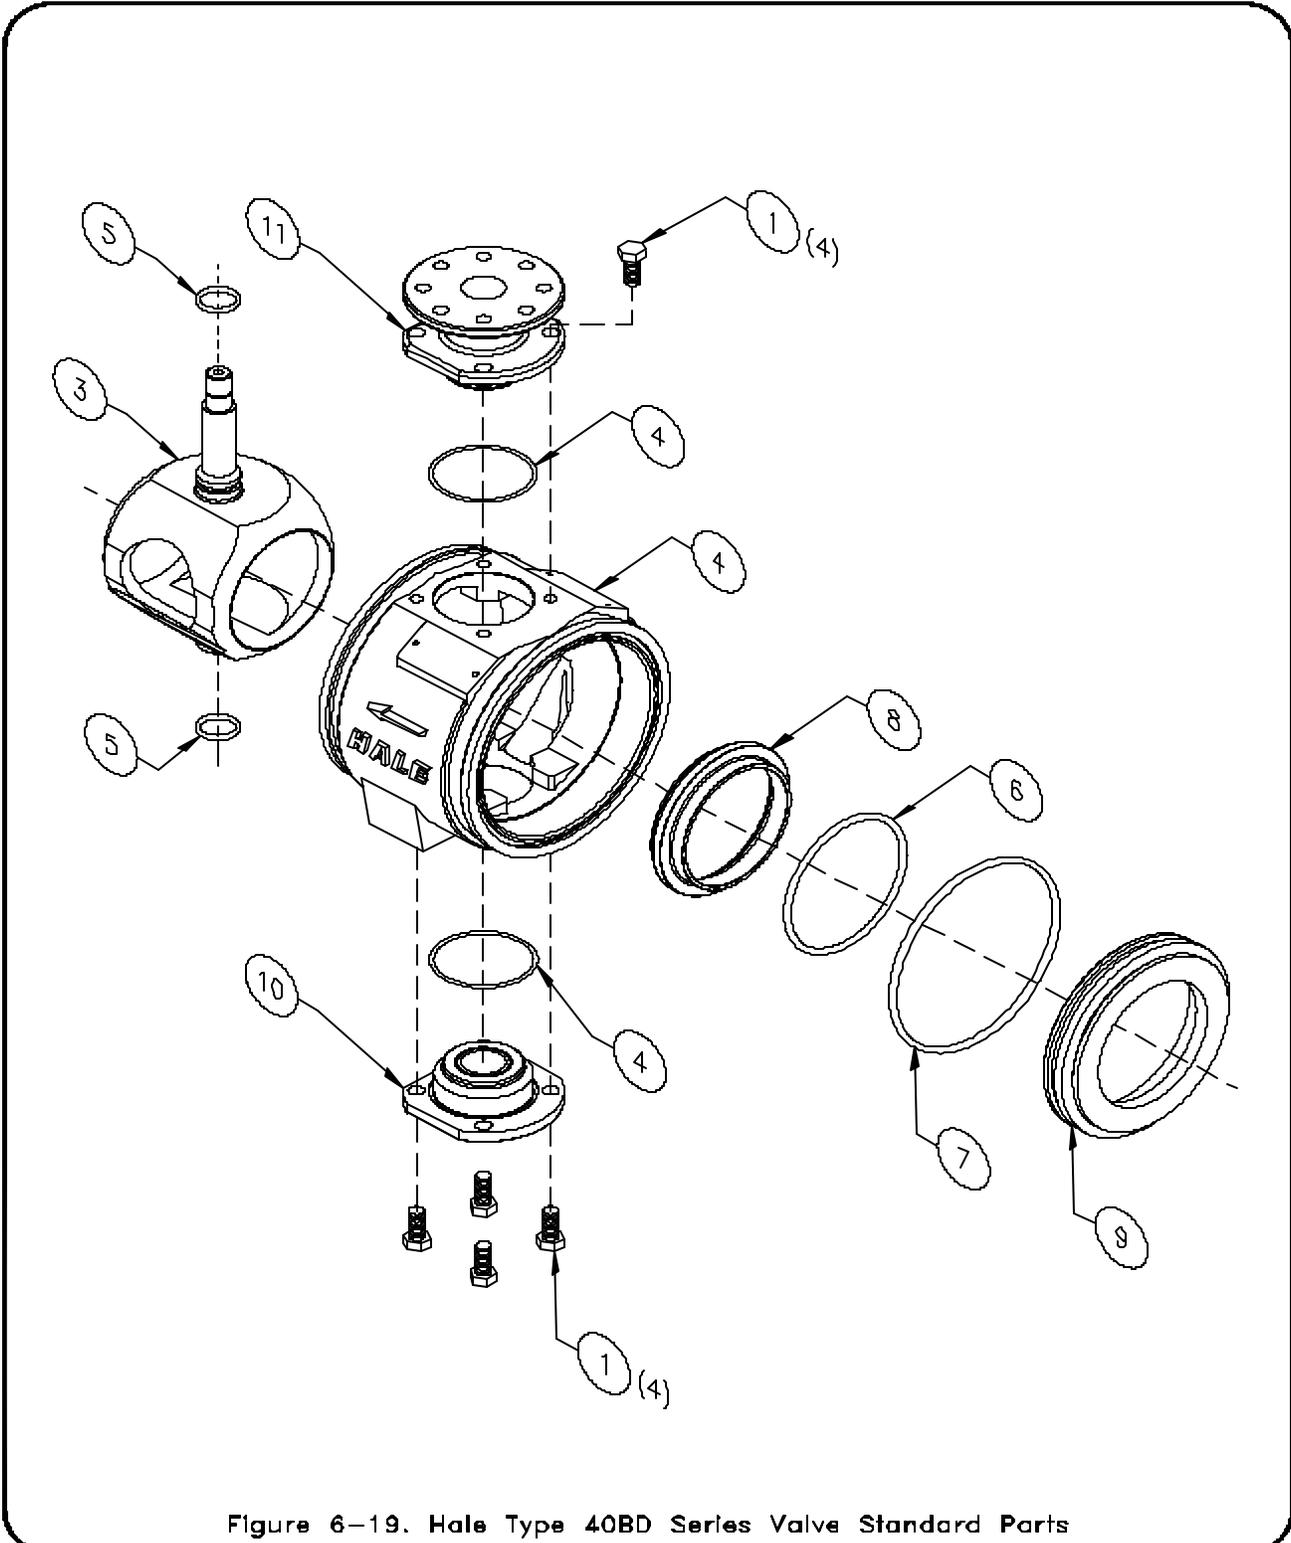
HALE Type 40BD Series Valve Standard Parts
